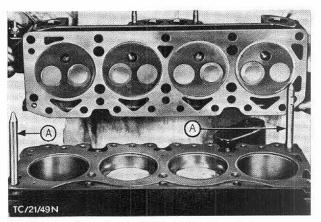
Fit cylinder head with aid of locating studs. A - Locating studs.
